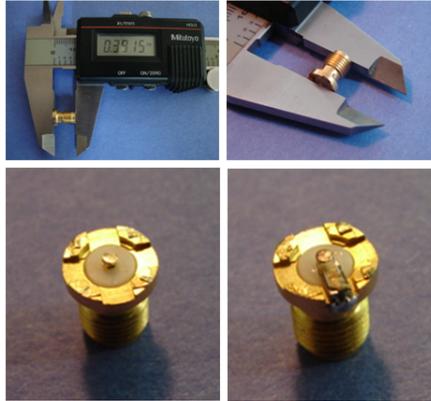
The open calibration piece and the DUT fixture are identical 3.5 mm connectors with identical mechanical dimensions. Identical connector lengths, measured from the edge of the connector center pin to the outside shell of the connector, is mandatory in order to maintain accurate measurements.
